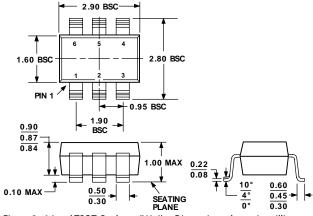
6-Lead TSOT Package (UJ-6)—Dimensions shown in millimeters
